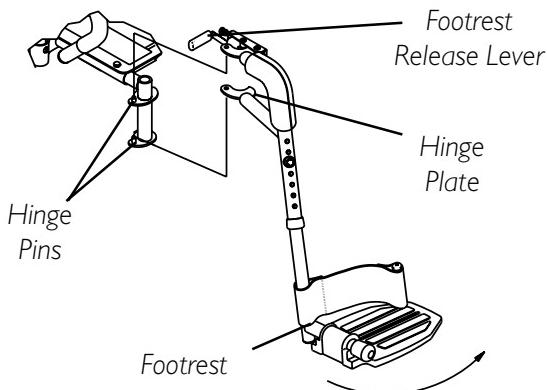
INSTALLING/REMOVING FOOTRESTS - 70°/TAPER PIN STYLE
